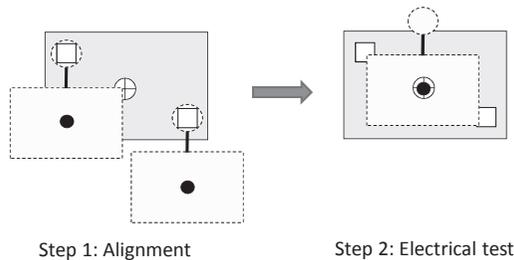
Electrical PCB inspection (alignment operation and electrical test)
